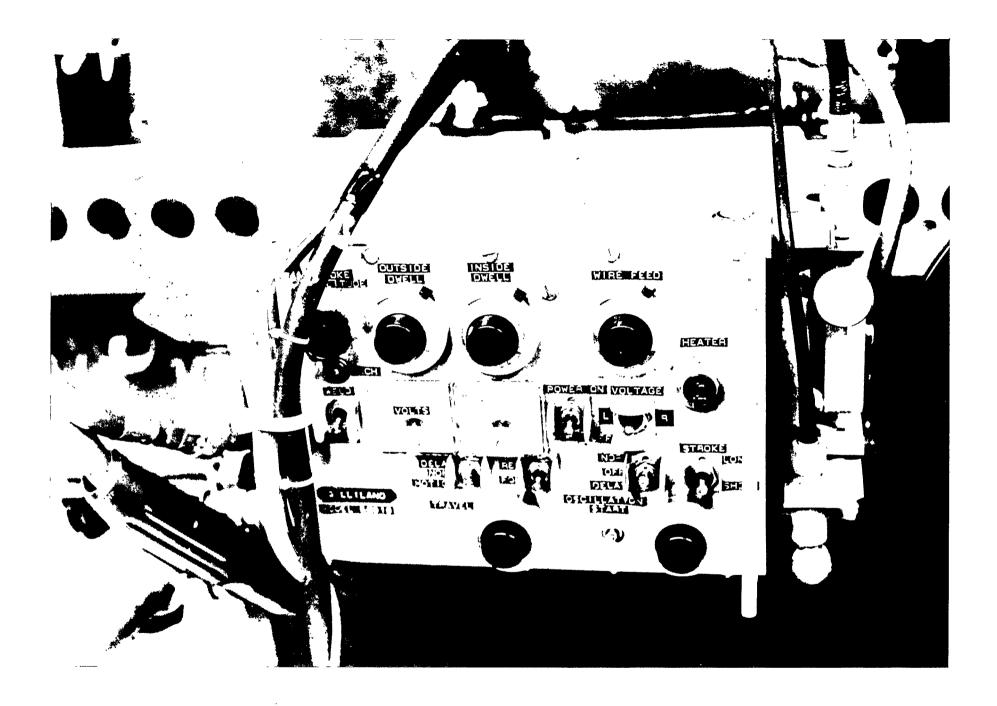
CLOSE-UP VIEW OF GILLILAND TRACTOR UNIT.
